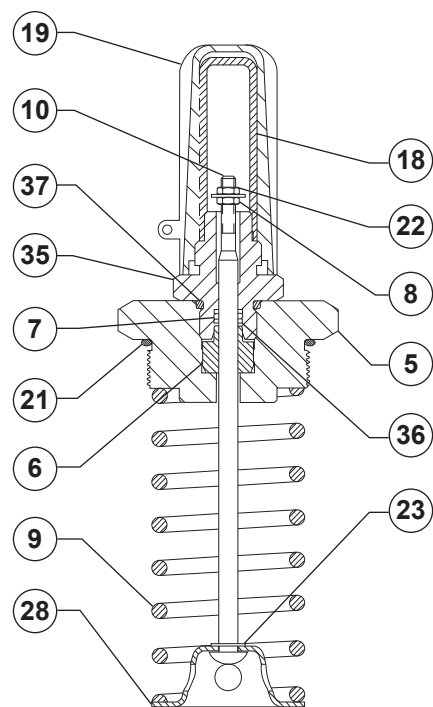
Types 1098-EGR and 1098H-EGR Travel Indicator Assembly
